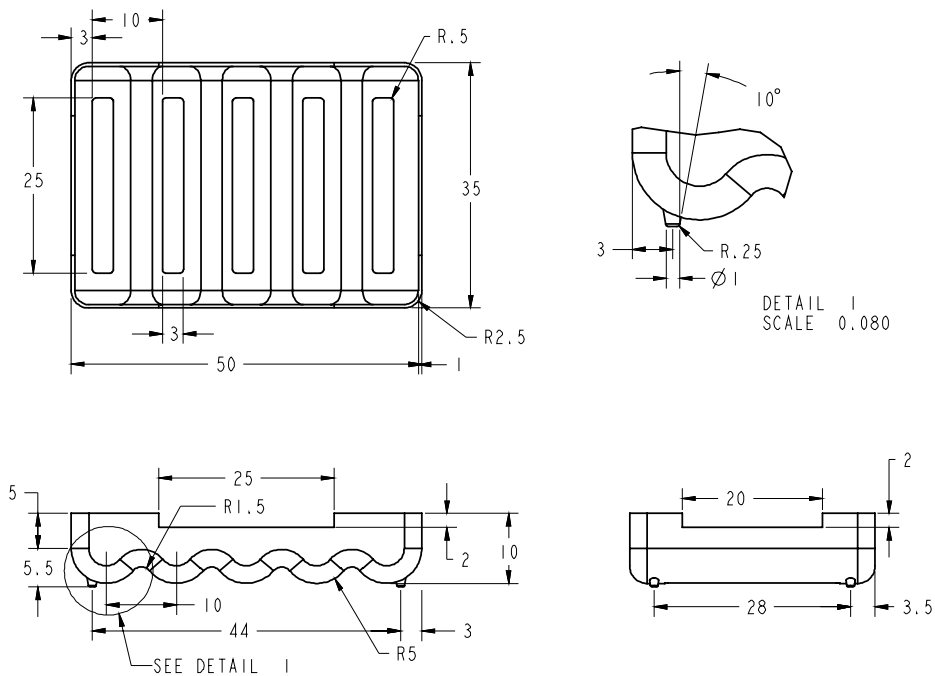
Top, sectioned front, right-side, and detail view of the soap case
